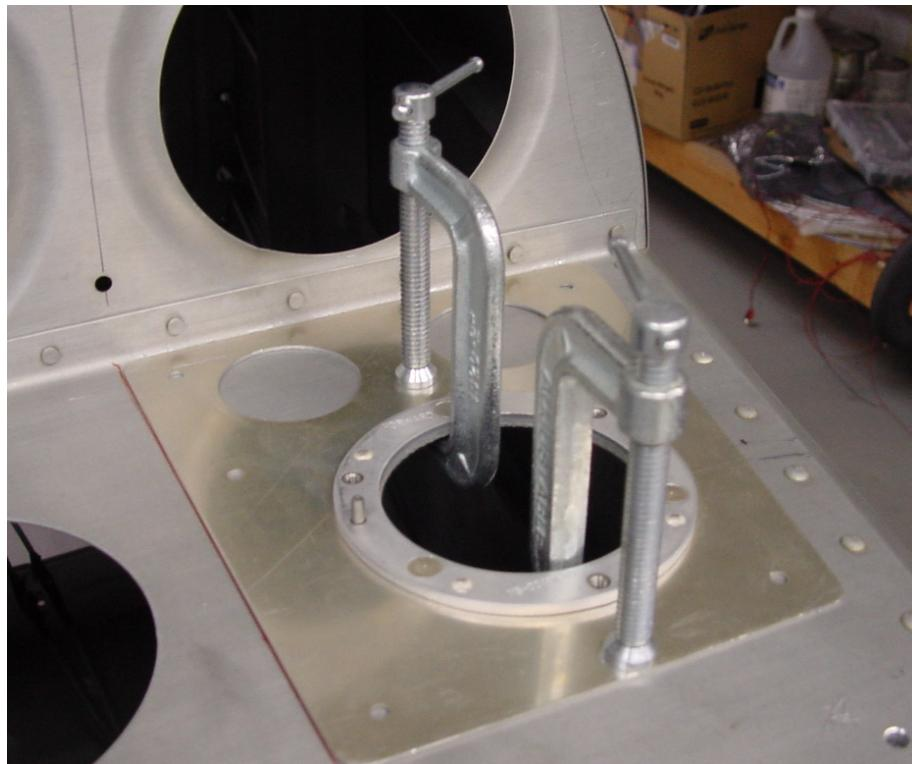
RV-7/9 GMU 22 Mounting Bracket on the F714 Aft Deck
